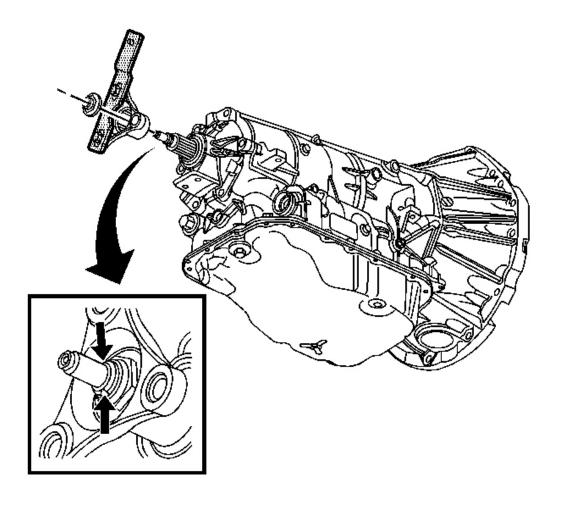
View Of J 45012 Courtesy of GENERAL MOTORS CORP.
